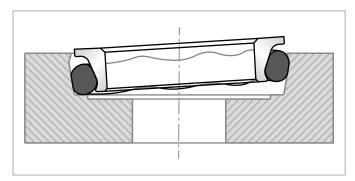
O-Ring slipped against the seat and waved against the metal ring
